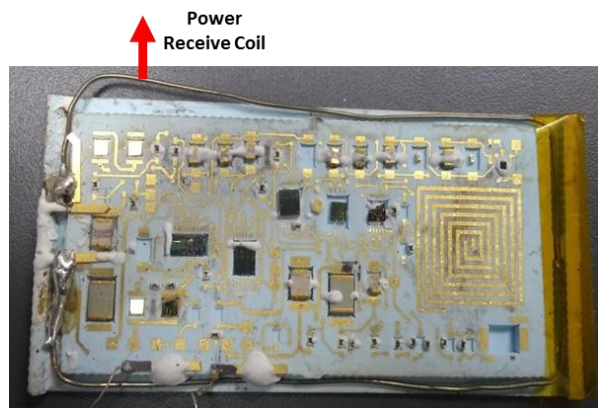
Fraunhofer module-2 after assembly of the components and the power receive coil to test/validate the full-bridge rectifier and wireless power transfer method.
